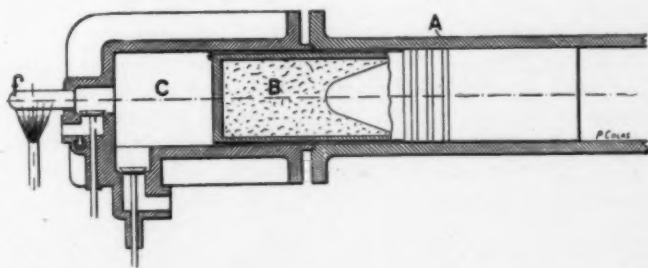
Section of early Daimler, showing tube ignition, patented in 1884.
